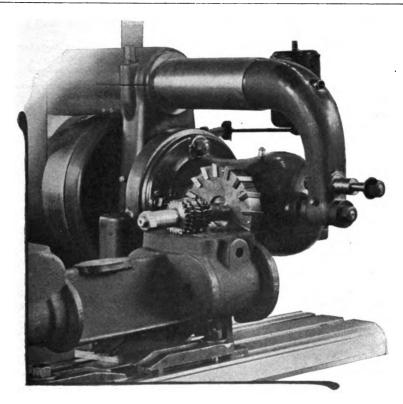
SIXTH OPERATION-MILLING STEAM AND EXHAUST PORTS.
